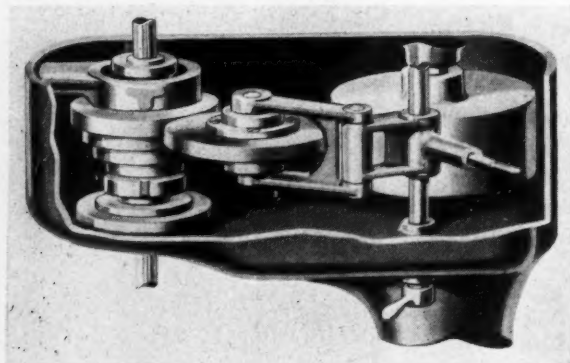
Nonmetallic roller acts as wedge to effect drive between motor and spindle pulleys
